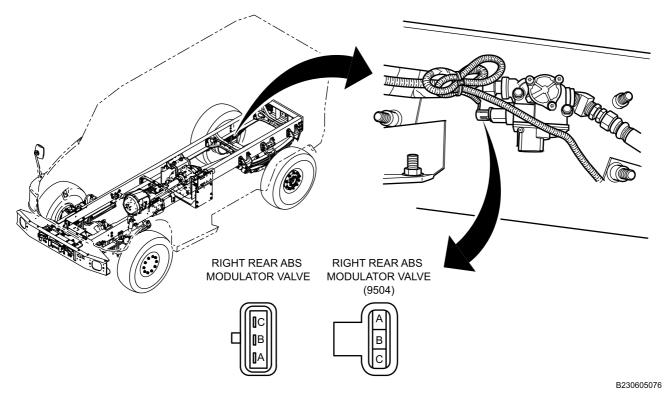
Inboard Right Frame Rail Near Right Rear Wheel.
